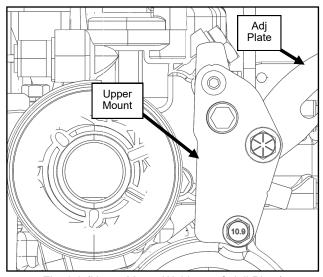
(Upper Mount Weldment & Adj Plate)
